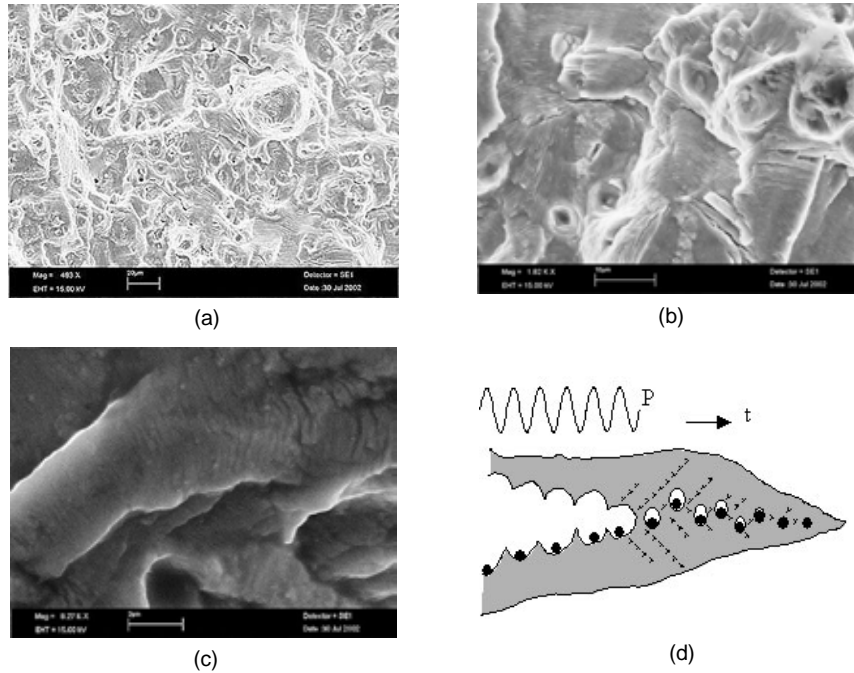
Fractographic of fatigue surface and simplified model of sub critical fatigue crack growth.
